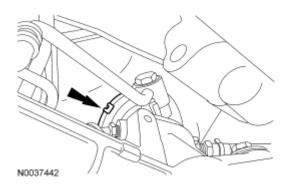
Locating Splash Shield Bolts Courtesy of FORD MOTOR CO.
